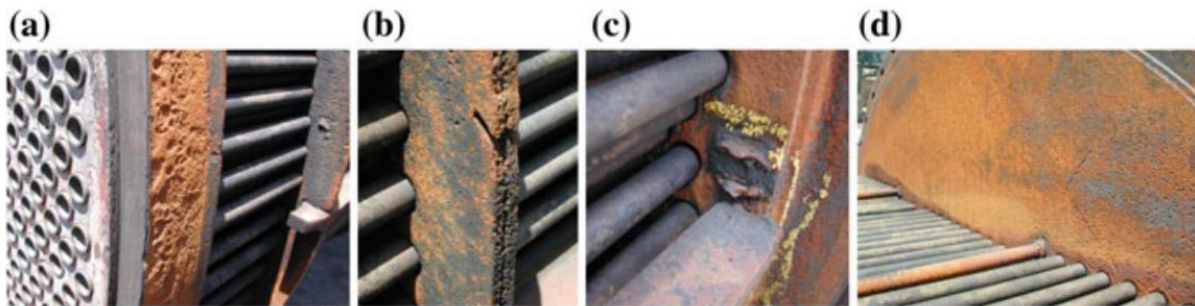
(a) bulkheads and corrosive steel sheets (process side). (b) erosion baffle. (c) A weld that is completely rusted and ruined. (d) The tubular plate's etched surface (process side)
